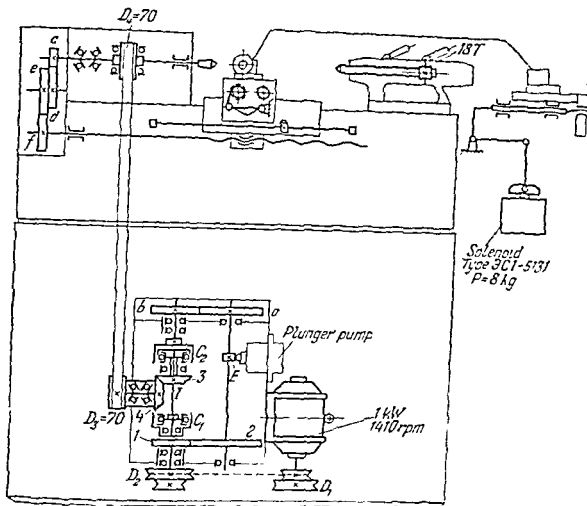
Gearing diagram of the model 103 semiautomatic precision threading lathe
